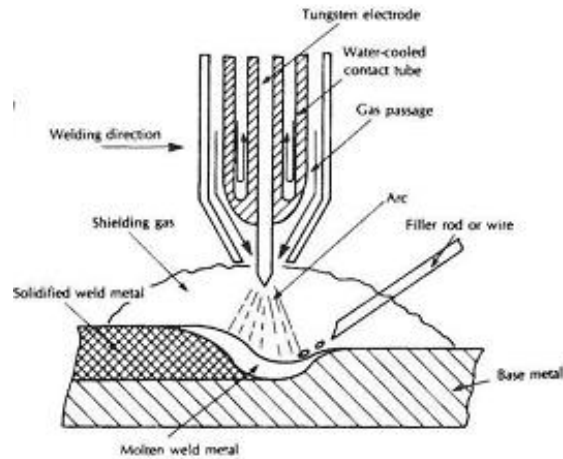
Schematic of a Tungsten inert gas welding process [55]
